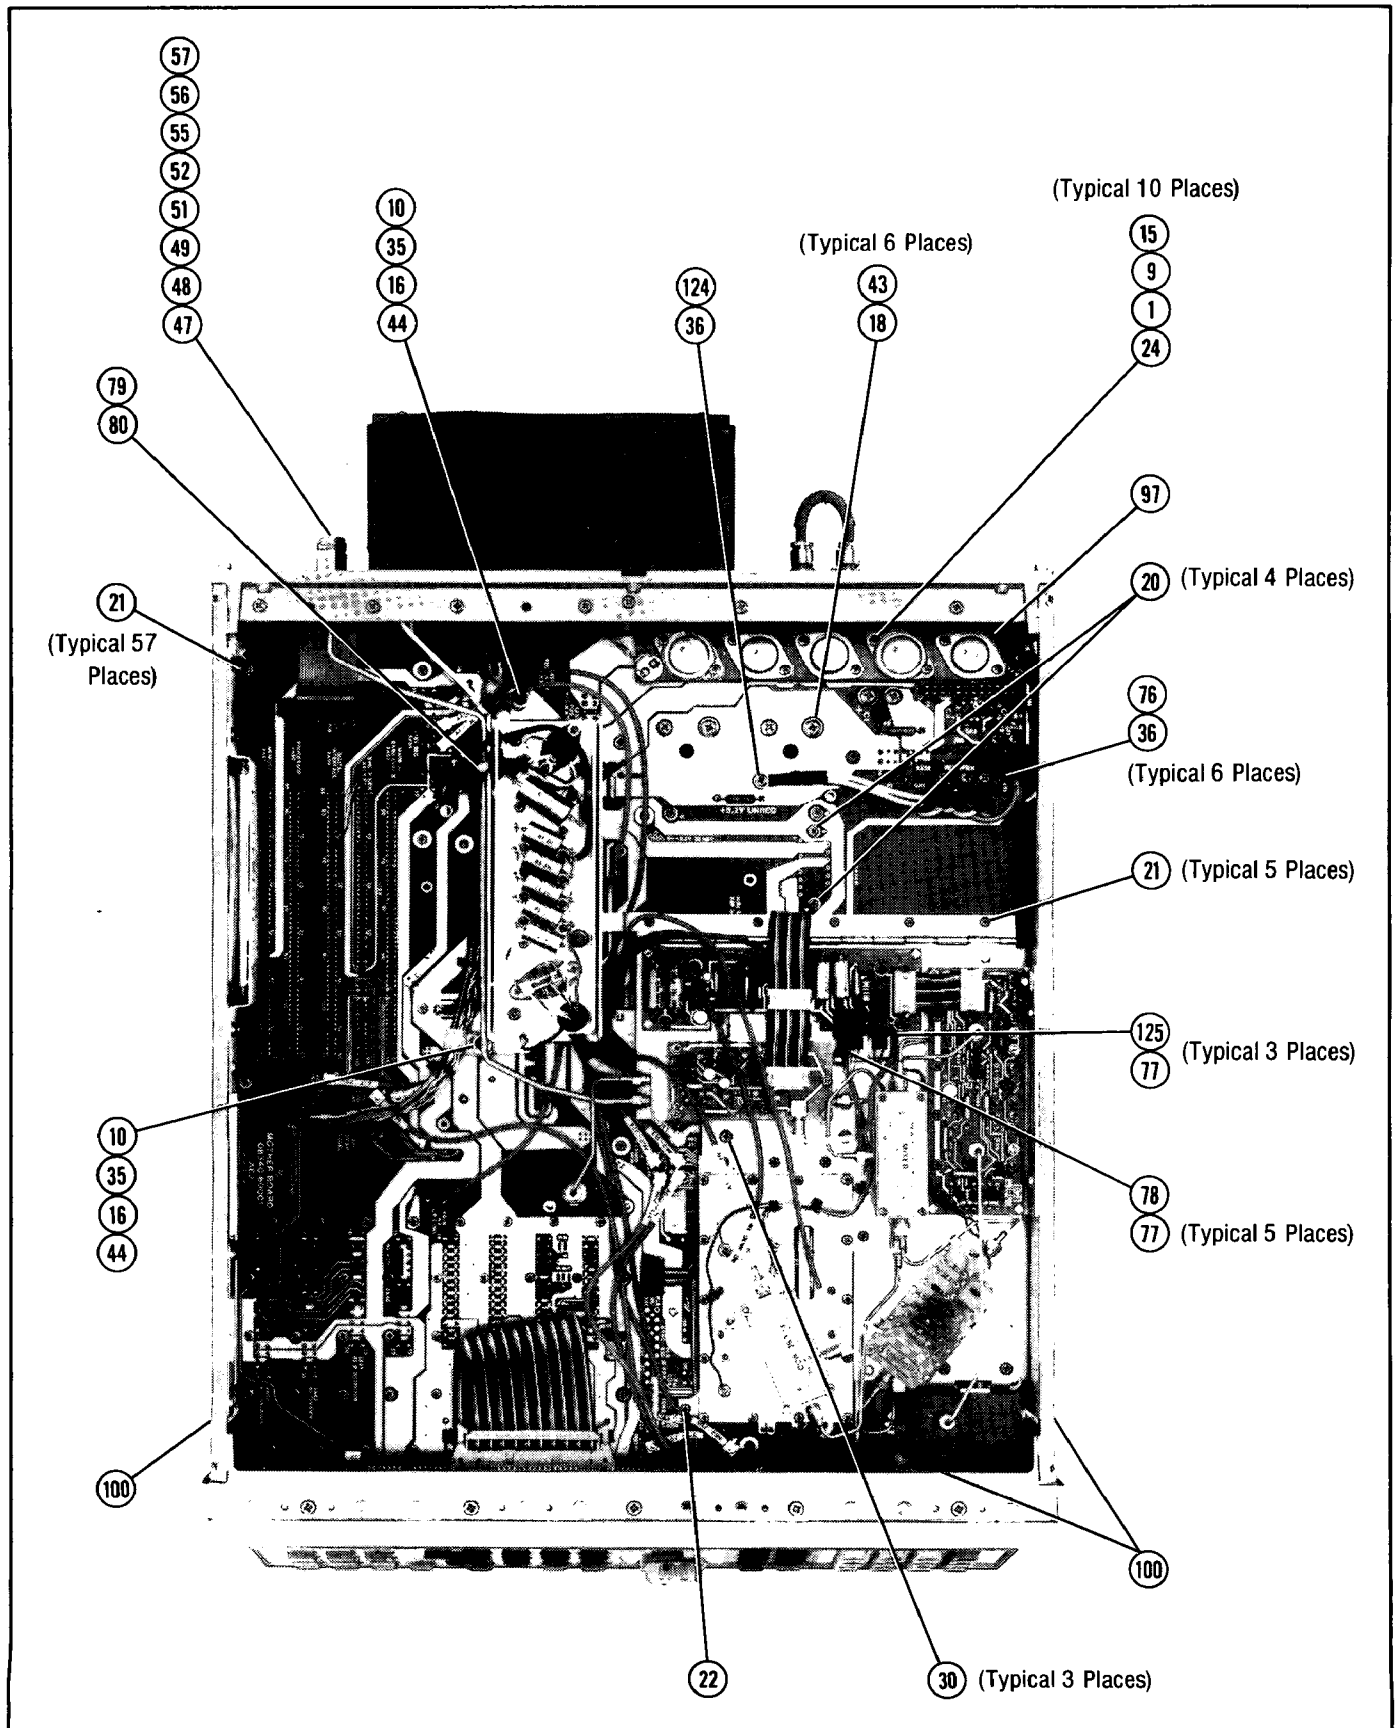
Miscellaneous Mechanical & Chassis Parts (5 of 9)
